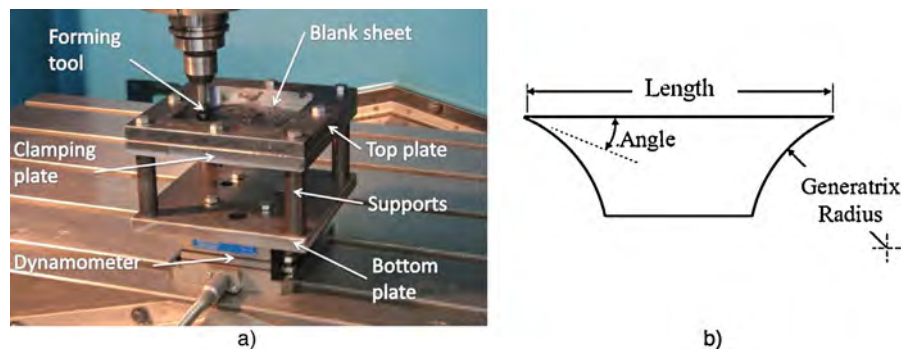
(a) Experimental set-up used on a 3 axis CNC milling machine. (b) Design of the pyramidal frusta of circular generatrix.
